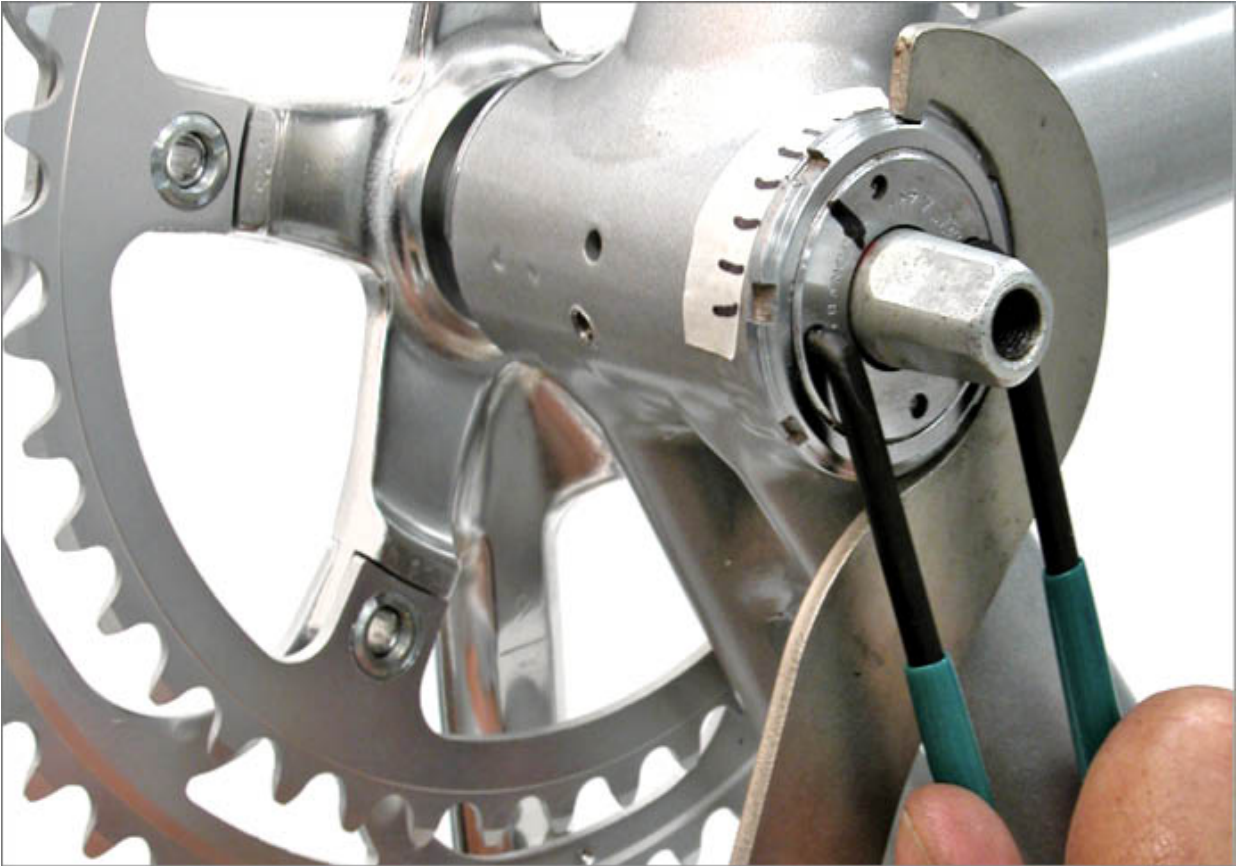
Use a sticker for reference marks when making small adjustments to the bearing cup
